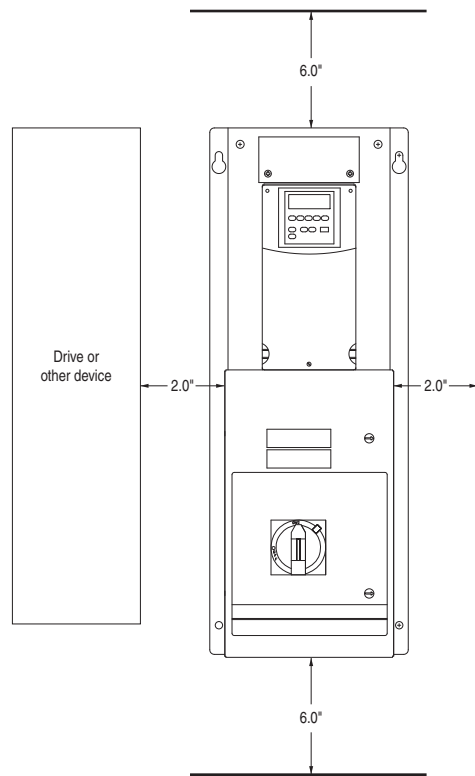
NEMA/UL Type 12 Minimum Mounting Clearances
